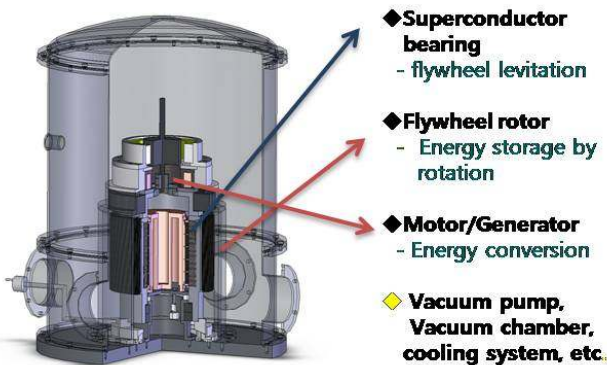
Design of superconductor bearing for 100 kWh SFESS
